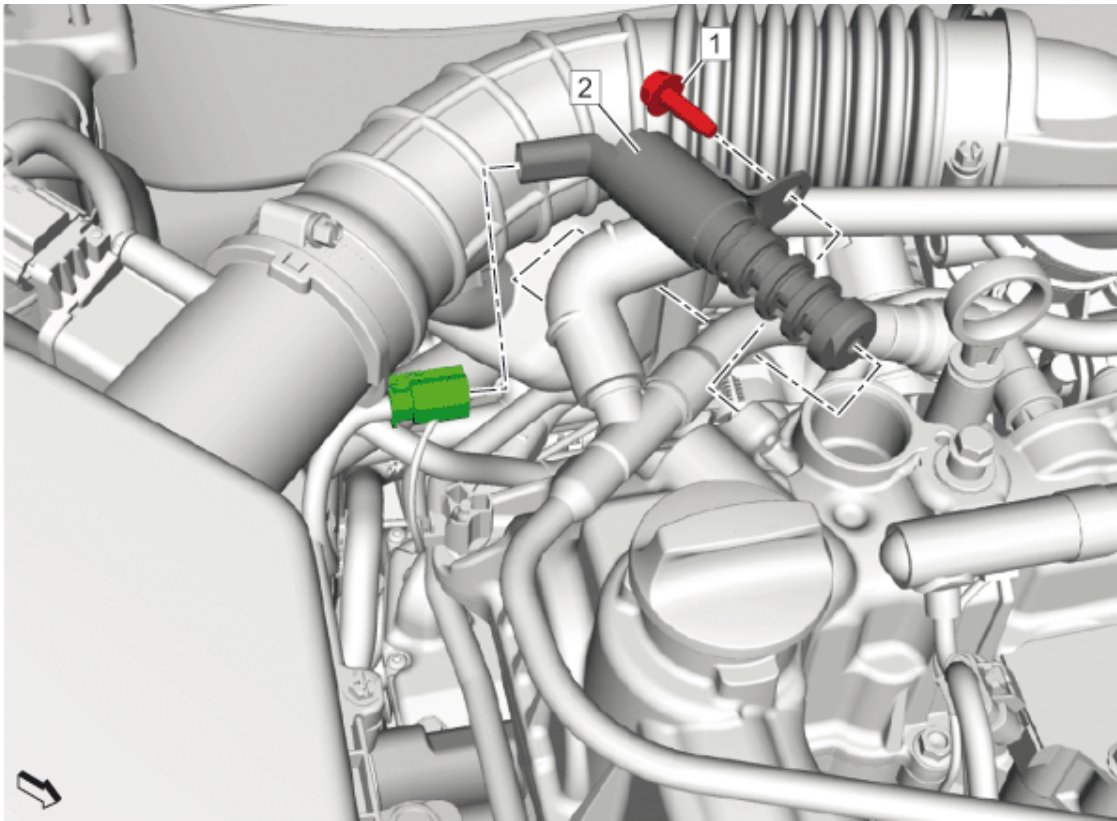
Camshaft Position Actuator Solenoid Valve - Intake
